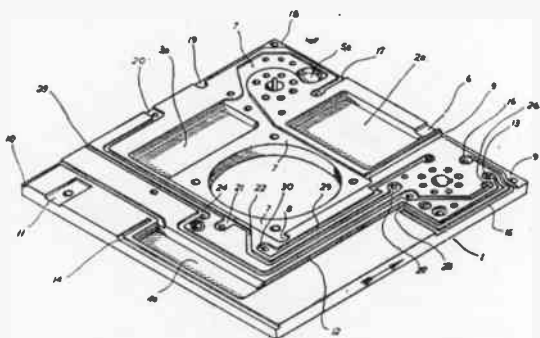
Perspective view of one side of a plate moulded from insulating material upon which a two-valve amplifier for a radio receiver is to be built up.
